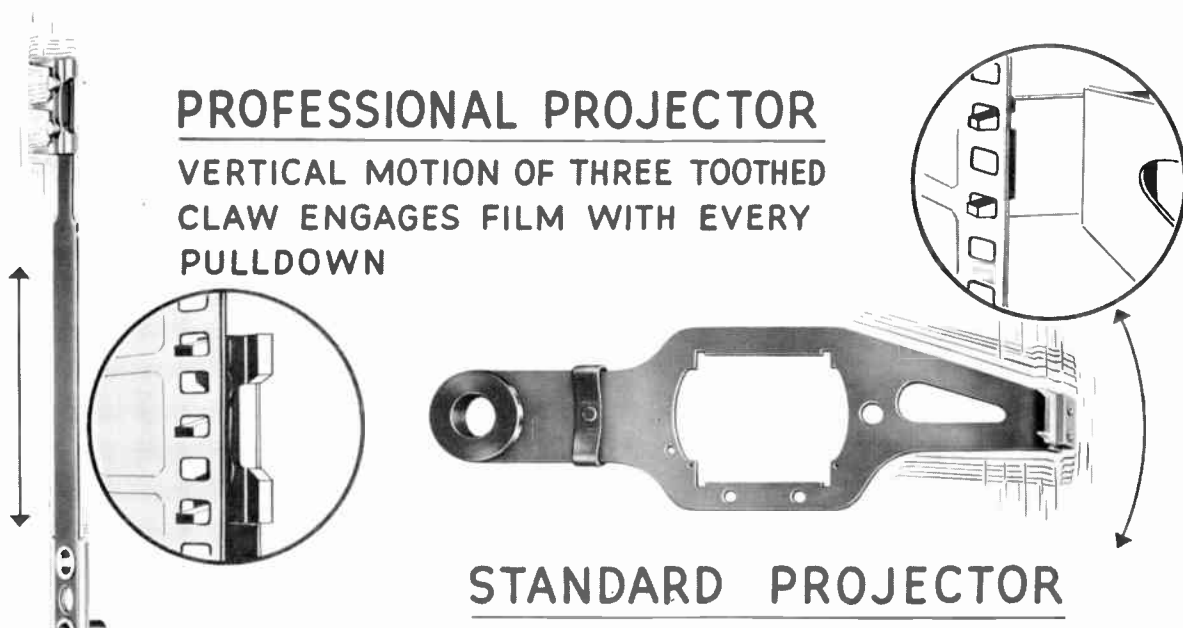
Three-tooth claw gives steadier pictures, permits positive pulldown even though film may contain broken sprocket holes.
